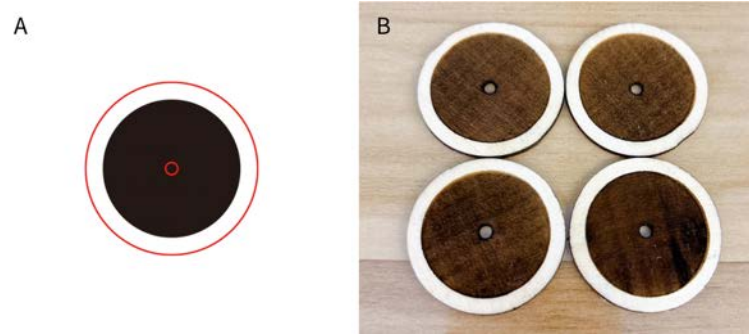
Design of Prototype III Part 1. A: Laser Cutting Design.(red lines for cutting, black areas for engraving). B: Samples after laser cutting.
